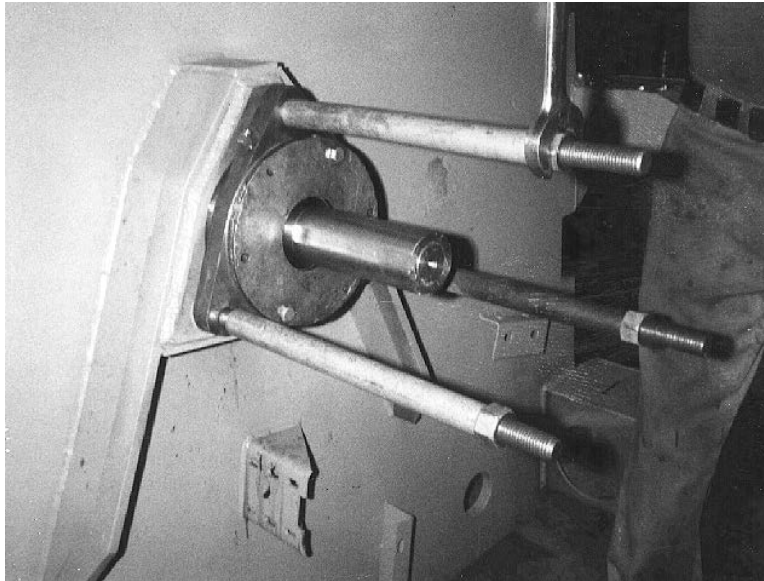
Pushing the Bearing Housing into the Shell (60" Rapid-load machine shown)
